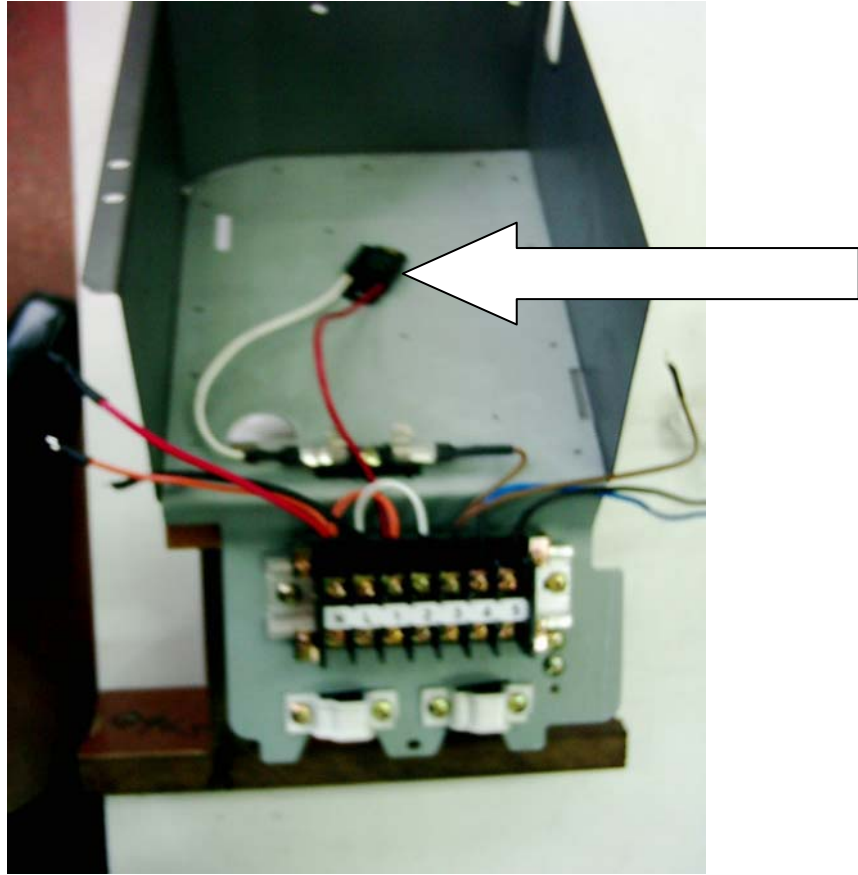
Assembling of fuse and sparkiller on to the metal sheet
